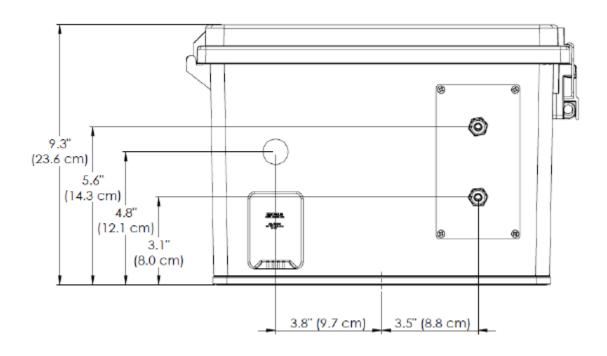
Industrial Enclosure Dimensions (Bottom View of standard single-port configuration).
